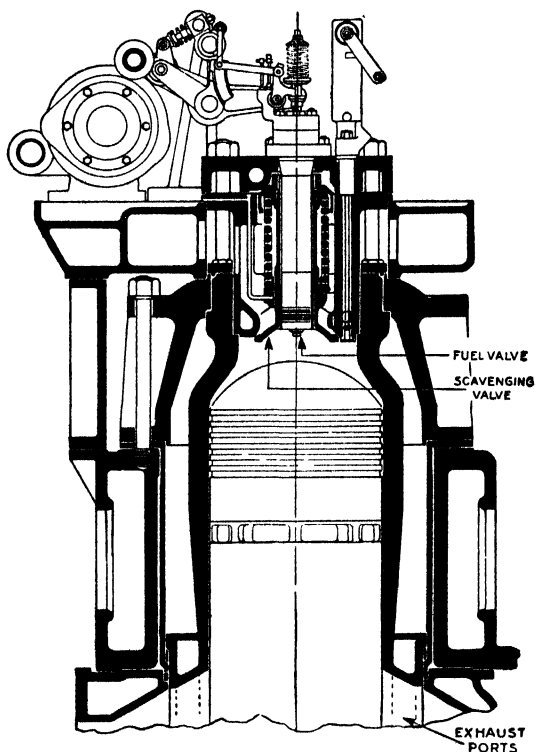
Section Through Valve Cage, Cylinder Head and Power Cylinder, Bethlehem Engine
